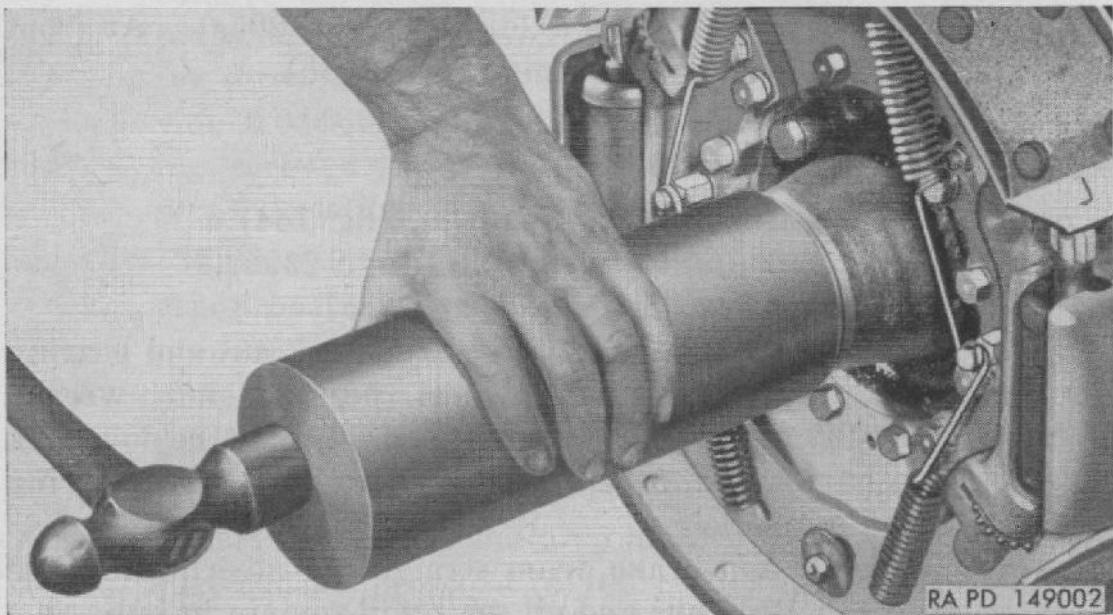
Installing oil seal sleeve (rear shown) using replacer 7950063.
